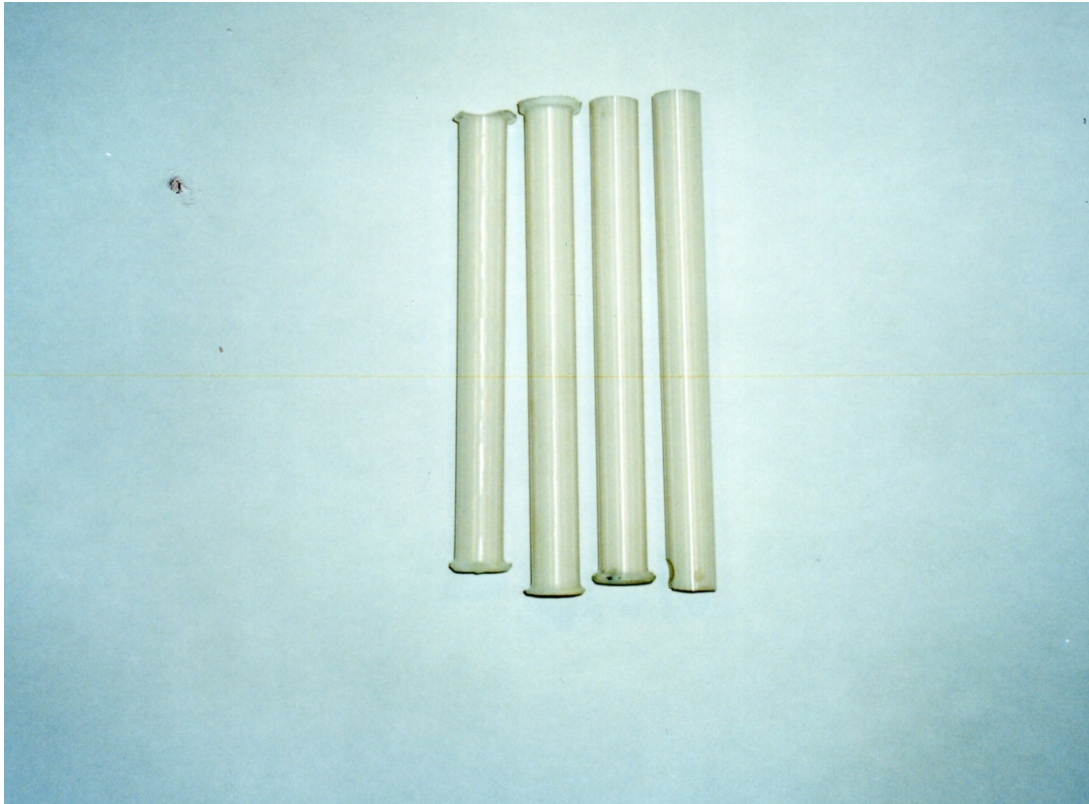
Samples Machine Ground to final dimension ready for cutting to final length.
